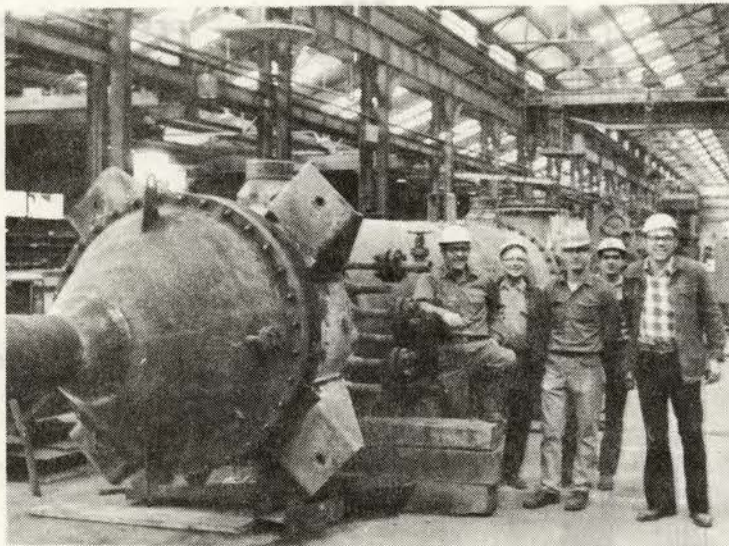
shows the day shift crew that did most of the fitting, welding, assembling and testing - left to right - Earnest Jones, Leadman on the job, James Cross, Ike Skweres and Joe Mattern.
